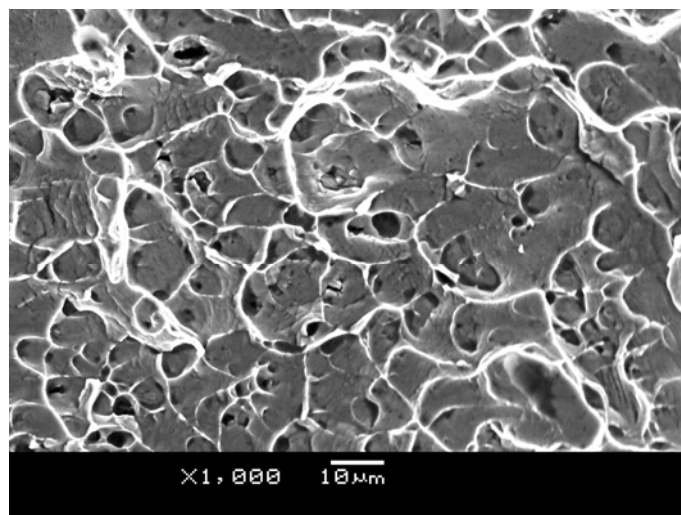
Fracture surface of base metal tensile sample
